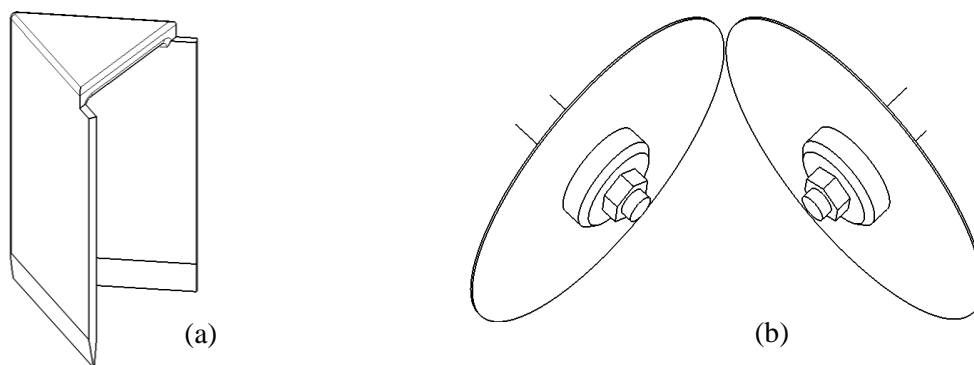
Two possible options of the head cutter blades: a) 'V' shaped blade and b) rotary blade.
